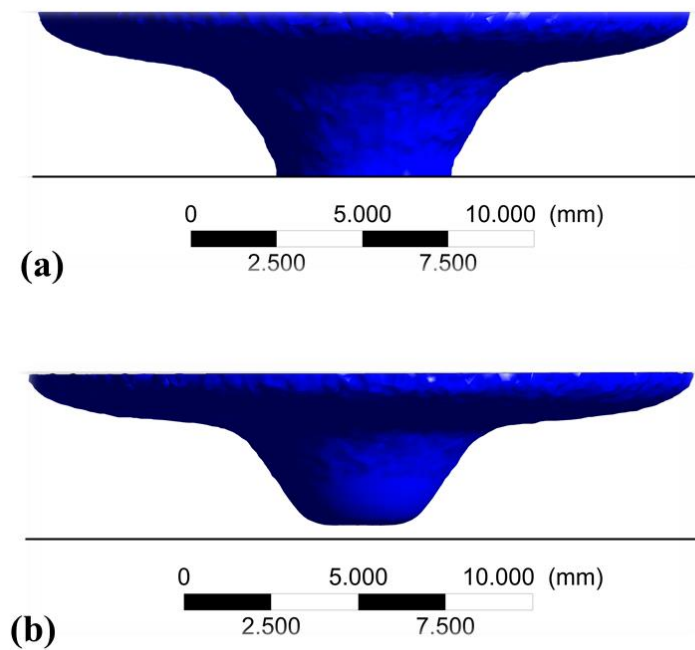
Shape of the weld zone at 1.66 mm s^{-1} and 300 rpm (a) unworn, (b) worn tool
